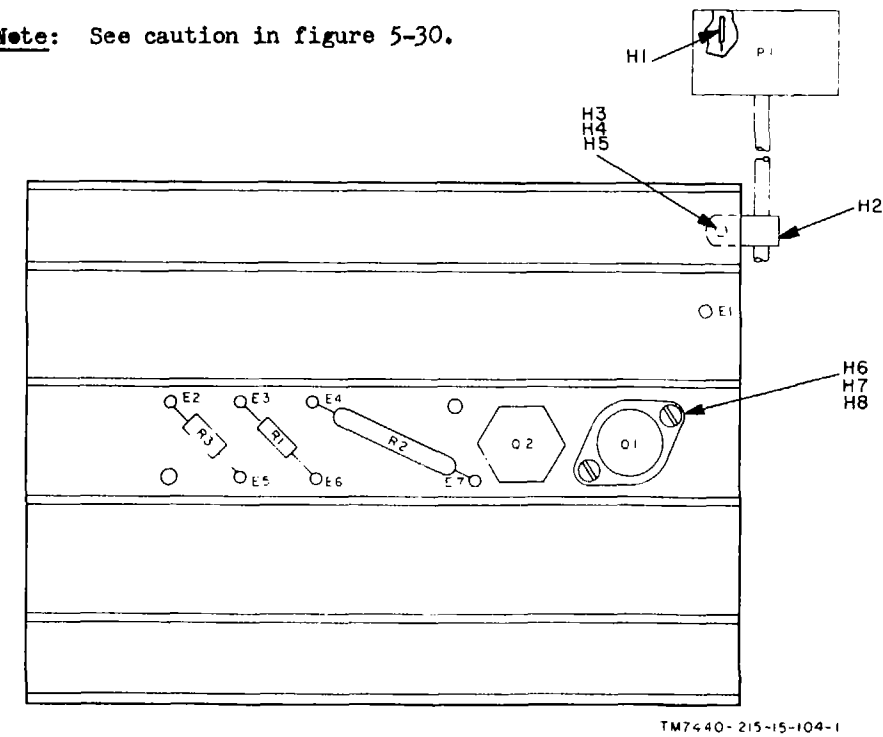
Heatsink components assembly (PS1A6), components location diagram.
